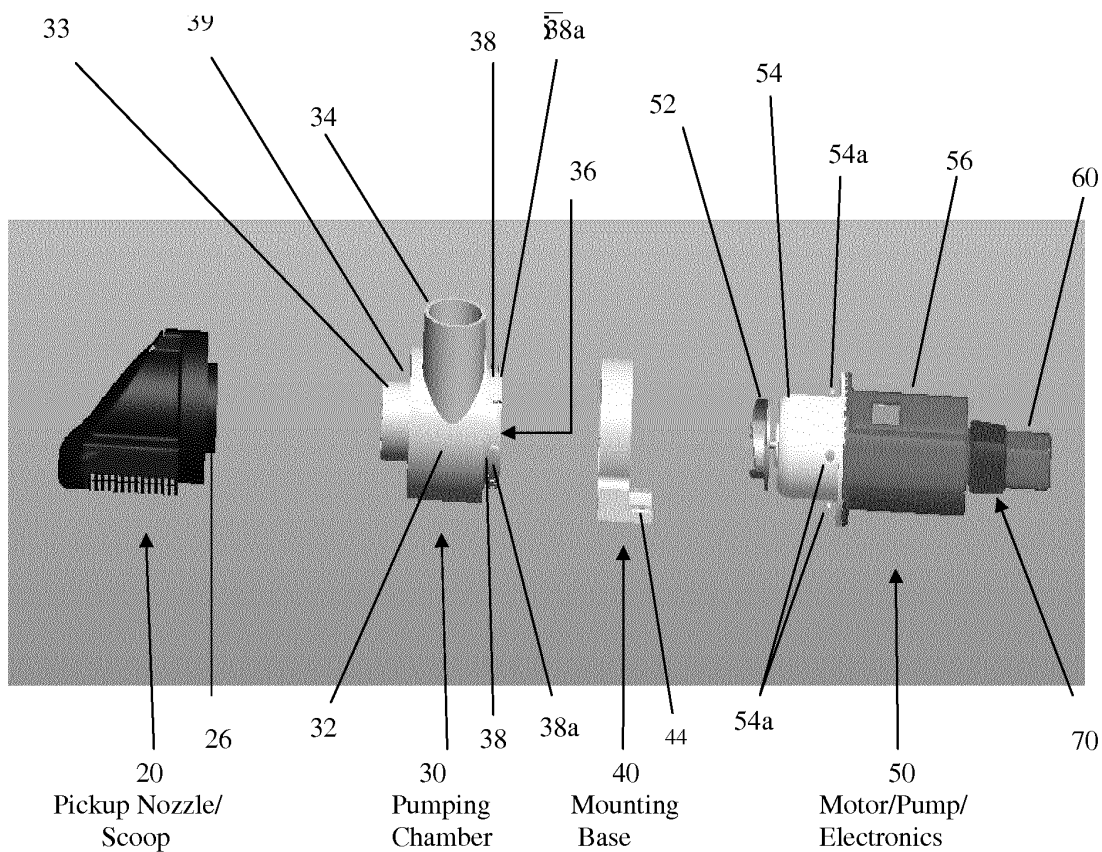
Exploded View of a Low Profile Pump having a Basic 4-Part Design
